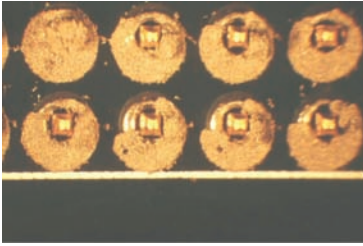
Pin in Hole/Intrusive Assembly conducted upside-down with components mounted in pallets and boards placed over the connectors from above.
